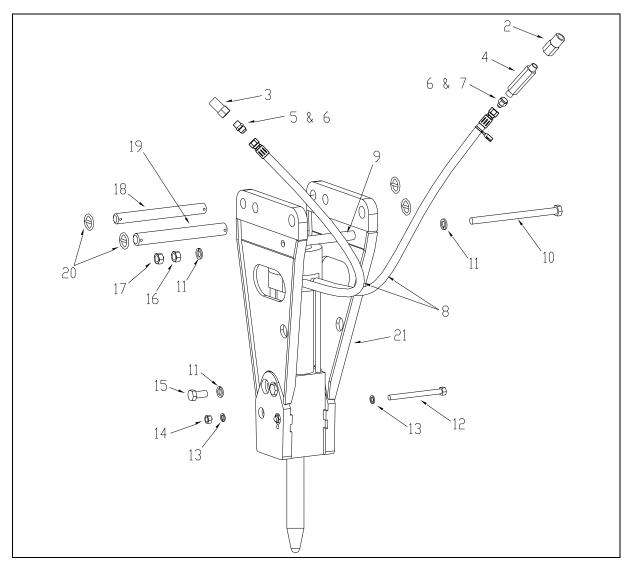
Hydraulic Components & BSF Housing Plates - Model AR70C
